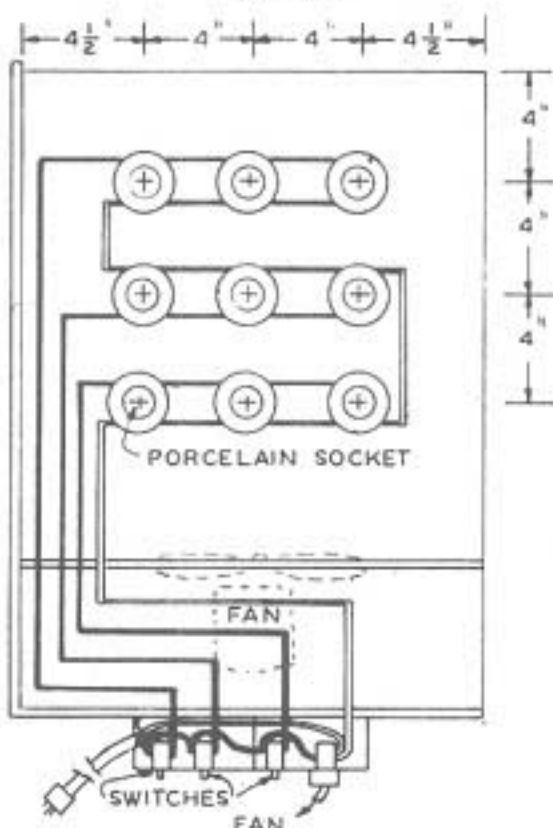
Socket location layout and wiring plan for use with three-switch control.
